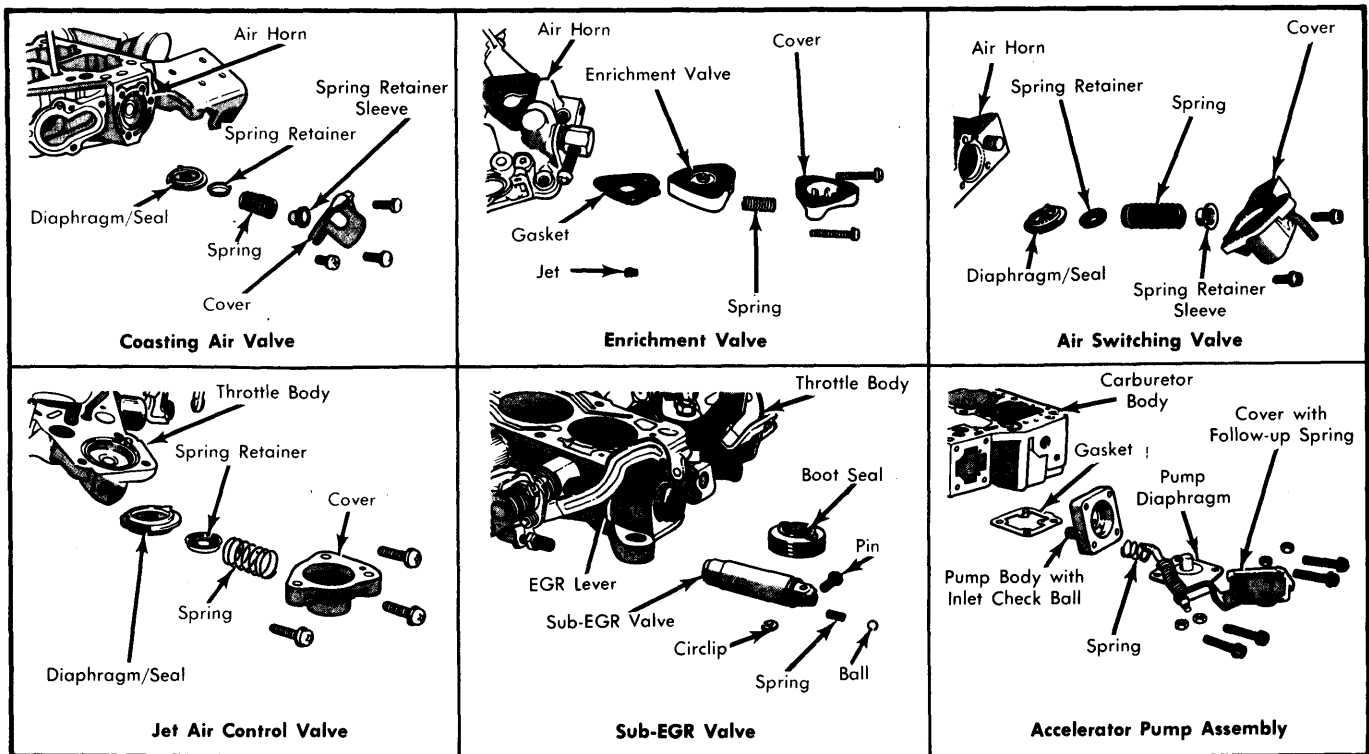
Exploded View of Valve & Pump Assemblies for Chrysler (Mikuni) Carburetor
